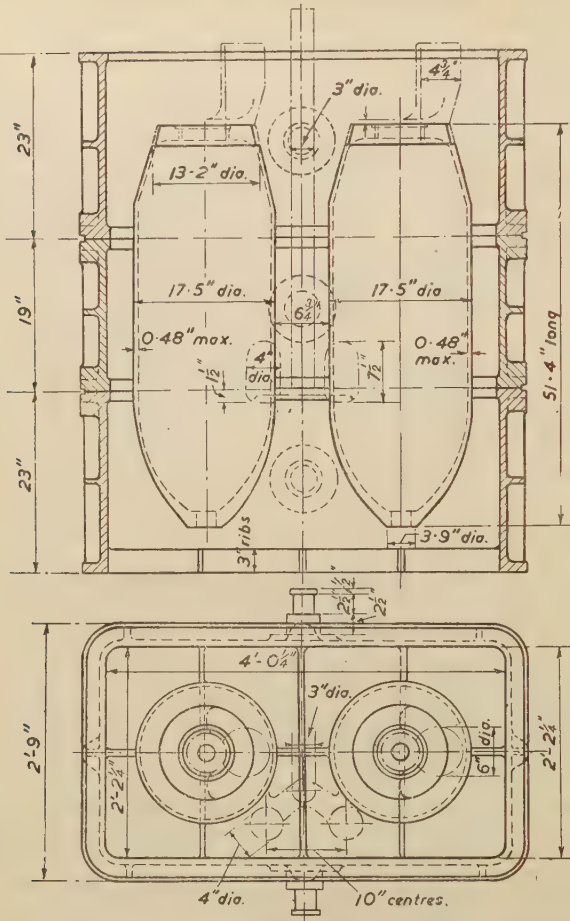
Foundry No. 3. Thin-walled steel castings and moulding boxes.
